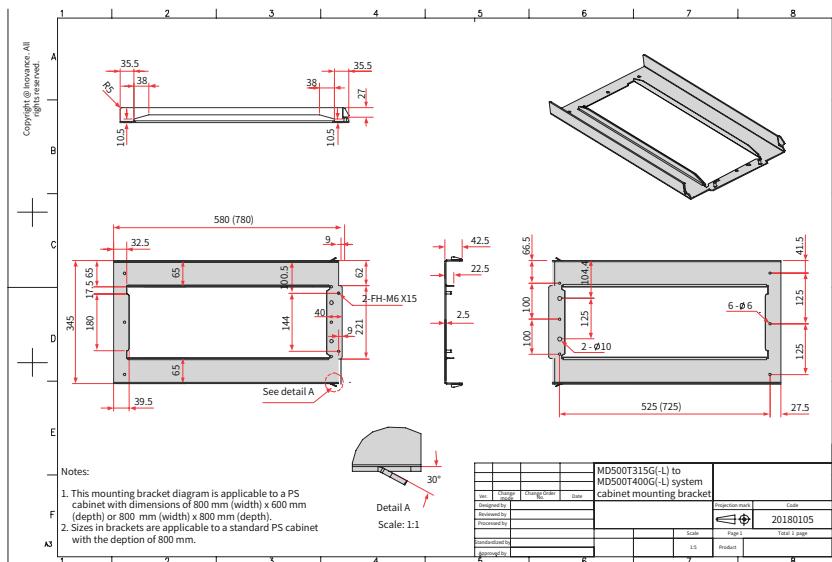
Dimensions of the mounting bracket for 315–400 kW AC drives (standard configuration) (mm)
